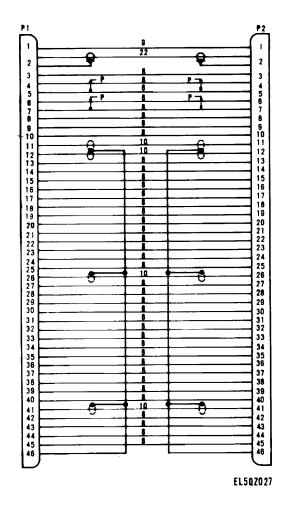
Cable Assembly, Special Purpose, Electrical 217-457554-001 (5Wi), Wiring Diagram.
